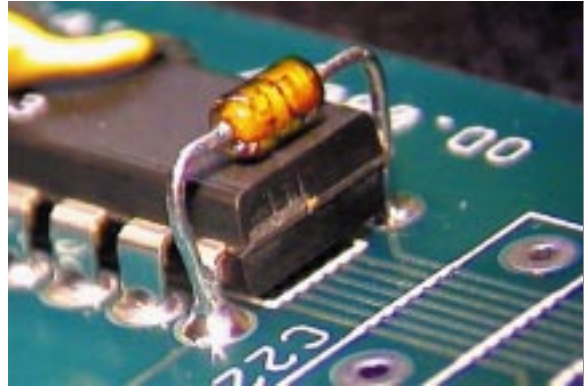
Axial lead component soldered to through hole component leads. Note: Leads of axial component should not be inserted into the plated holes.
